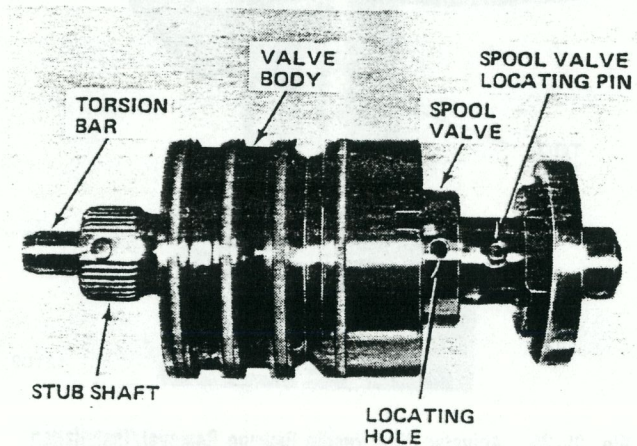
L-29 Valve Body and Spool Valve Disassembly
